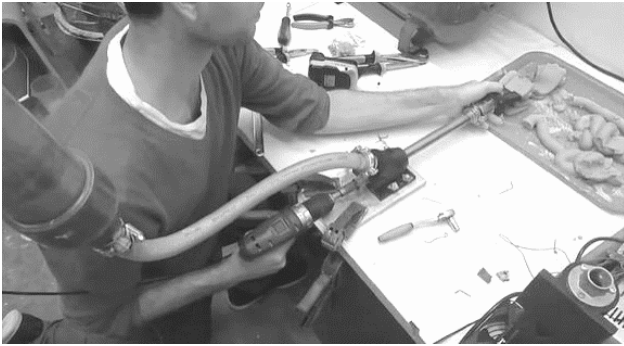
, Hand drill used as a high torque motor- proof of concept for the designed extruder and U-shaped nozzle
